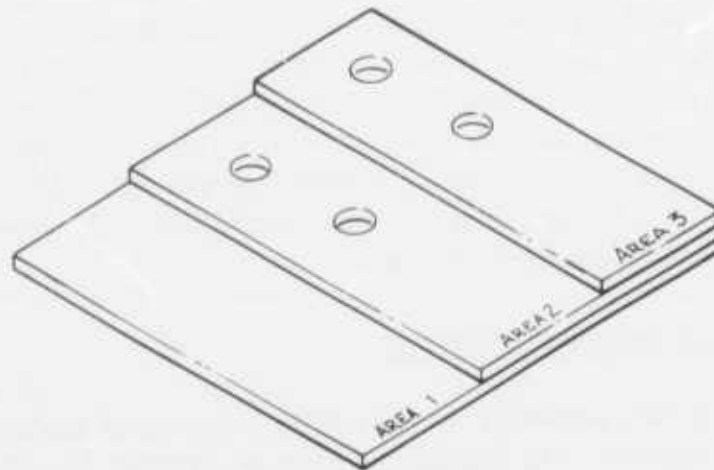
CALIBRATION STANDARD FOR IN-SERVICE INSPECTION OF WELDBONDED C-130 FUSELAGE PANEL
